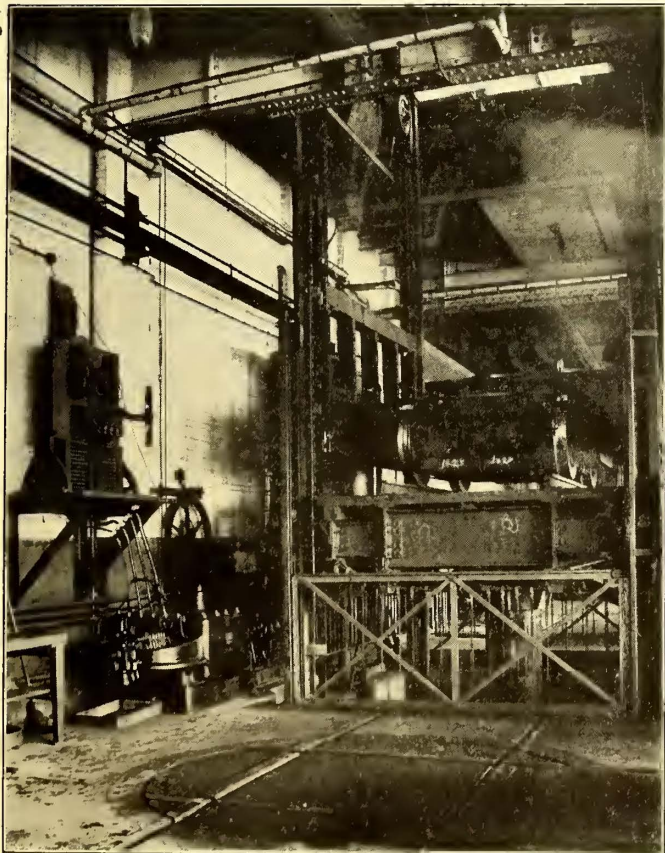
TRUCK ELEVATOR FROM REPAIR ROOM FLOOR, WITH TRUCK PART WAY DOWN
